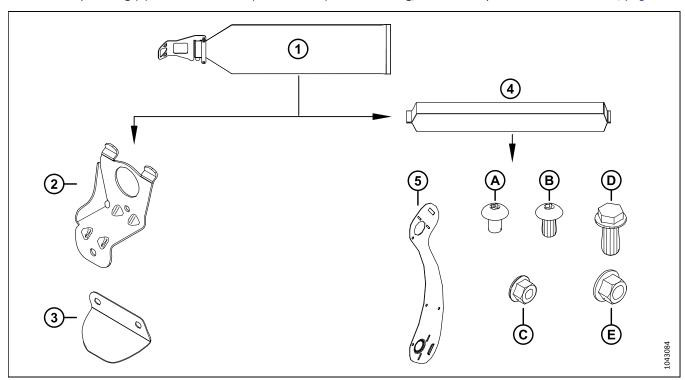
Left Reel Parts Retrieved from Parts Bag MD #368324
